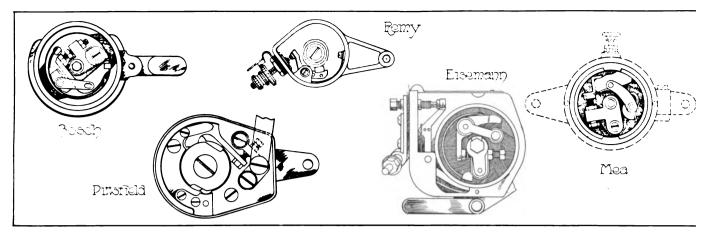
Conventional Types of Magneto Make and Break Mechanisms, Including Bosch, Remy, Mea, Pittsfield and Eisemann.
